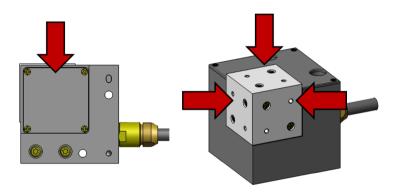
The marked surfaces may not be subject to mechanical stress. Left: Cover for the bottom of the P-616, right: The surfaces of the XYZ mounting platform
